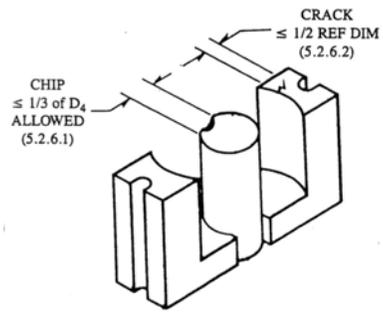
CHIPS & CRACKS ON MATING SURFACE
